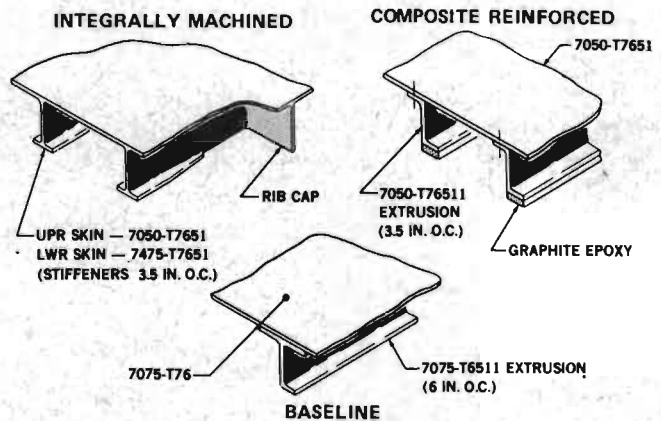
WING BOX COVER SKIN DESIGN CONCEPTS
